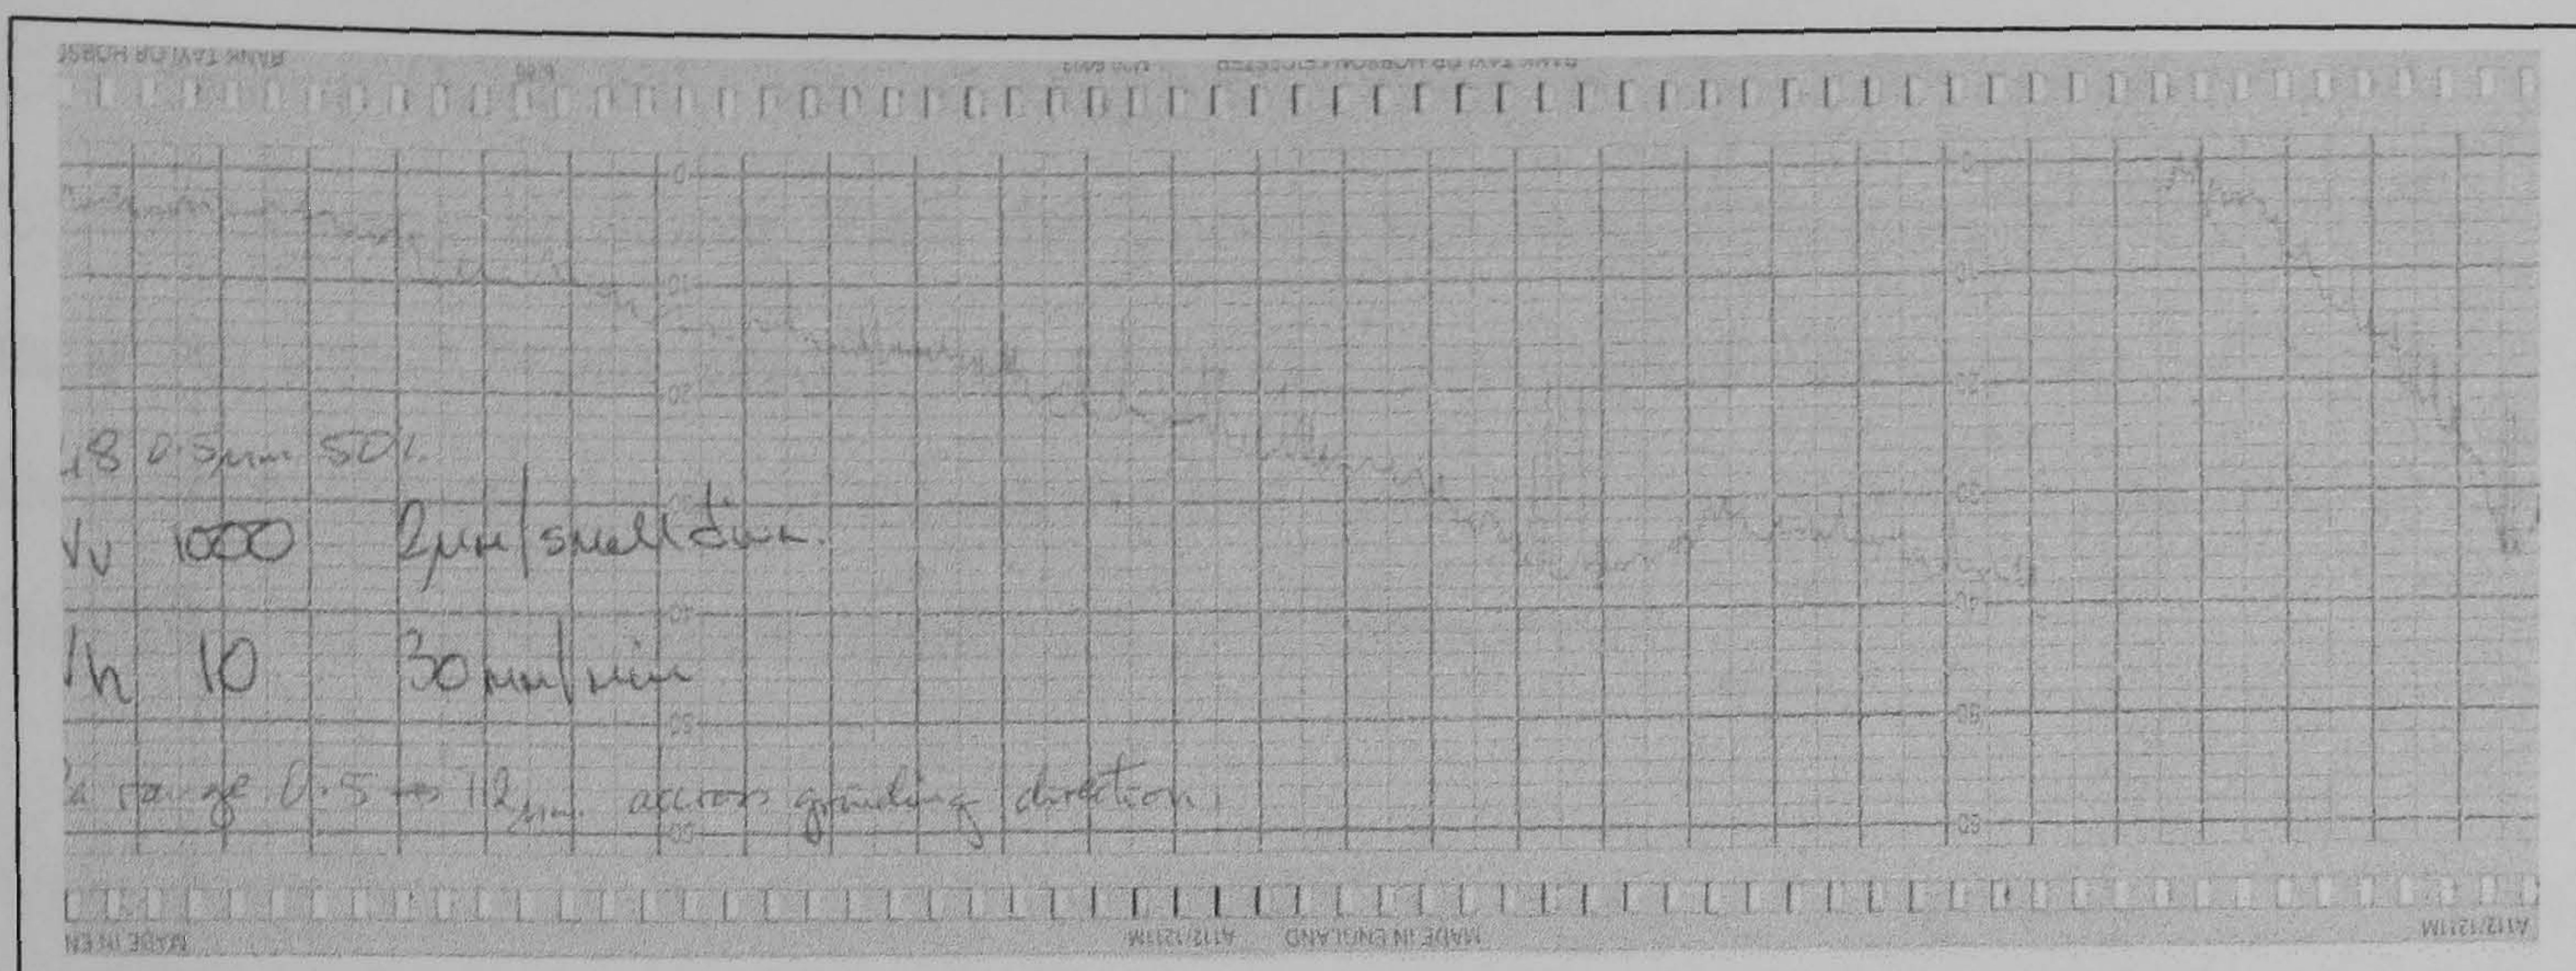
Surface profile of poorly machined bearing perpendicular to grinding direction
